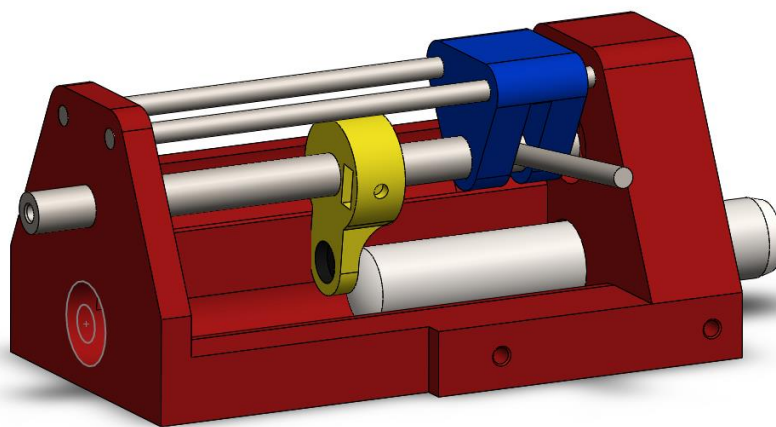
Breech block assembly, with carriage shown in blue, bolt face shown in yellow, and body shown in red. The projectile extends out the right side. The two pins flush with the left face are the sliders
